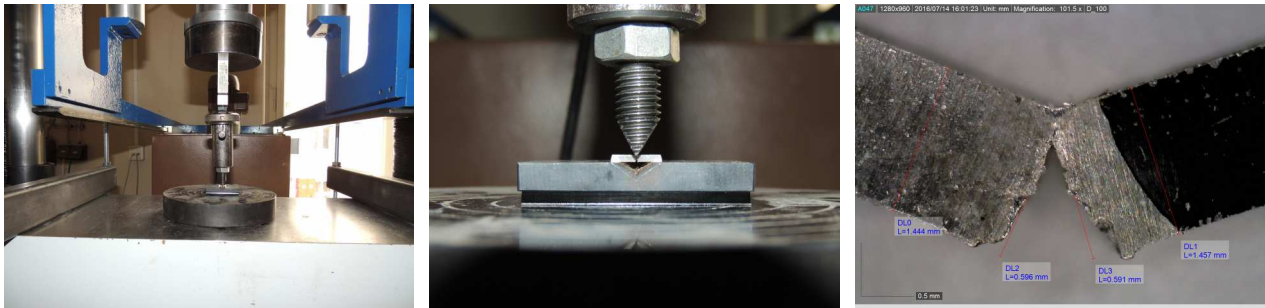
Three-point bending instrumentation and fractured sample Ax30_31.
